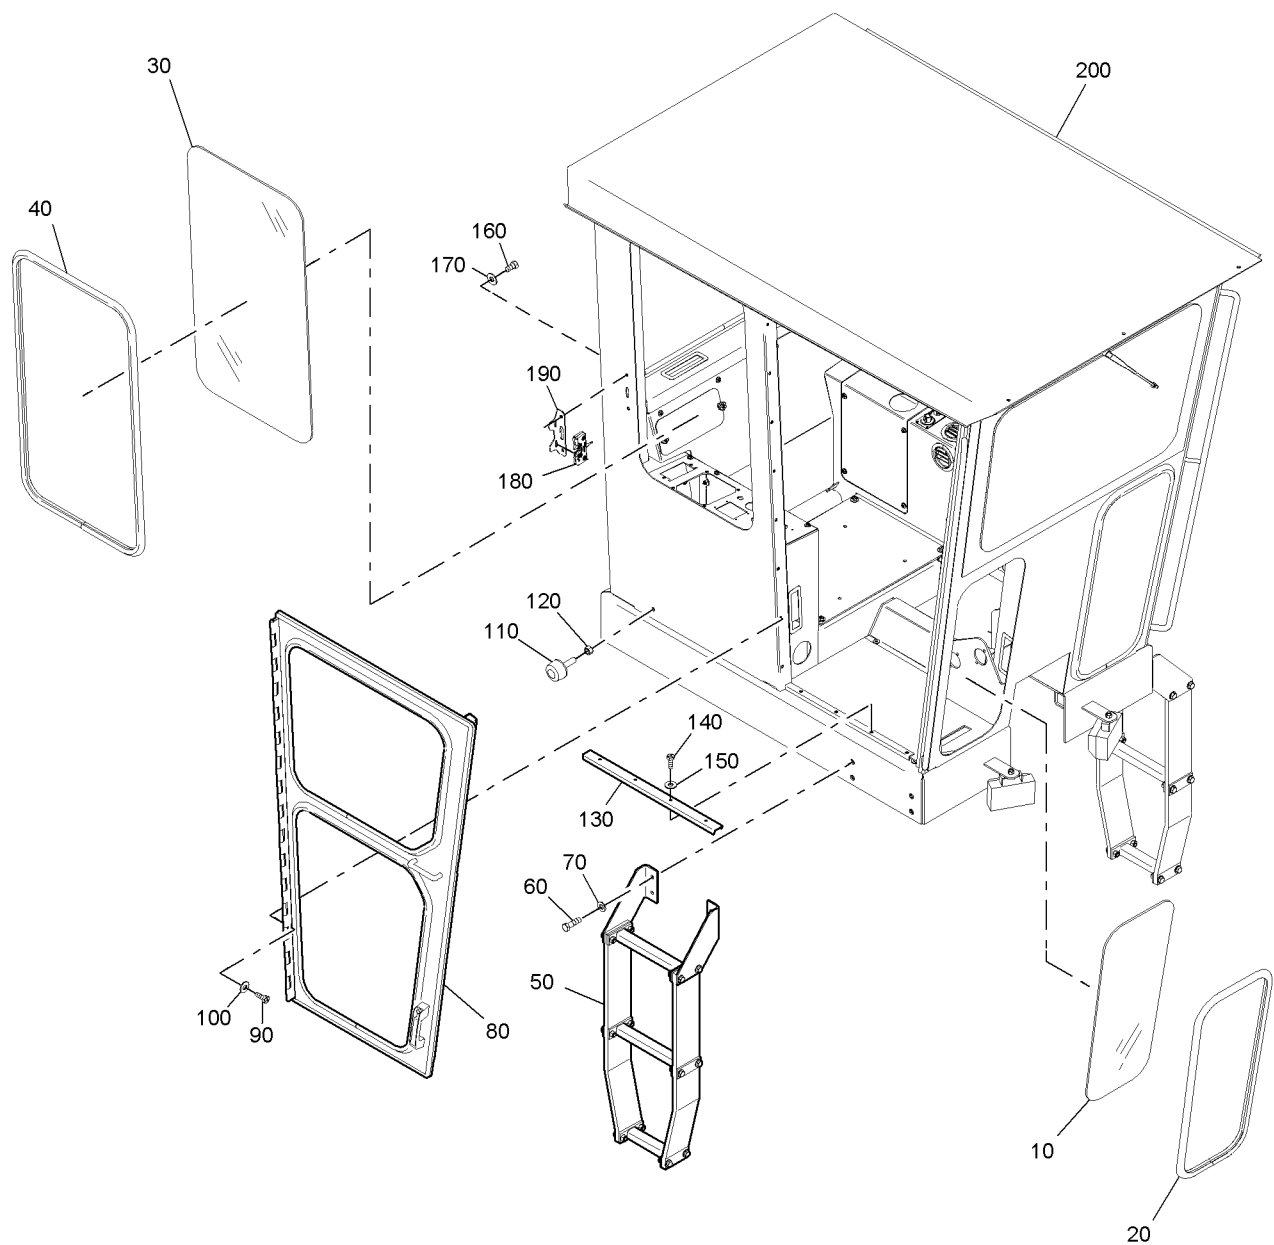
CAB ASSEMBLY (RIGHT SIDE VIEW)
